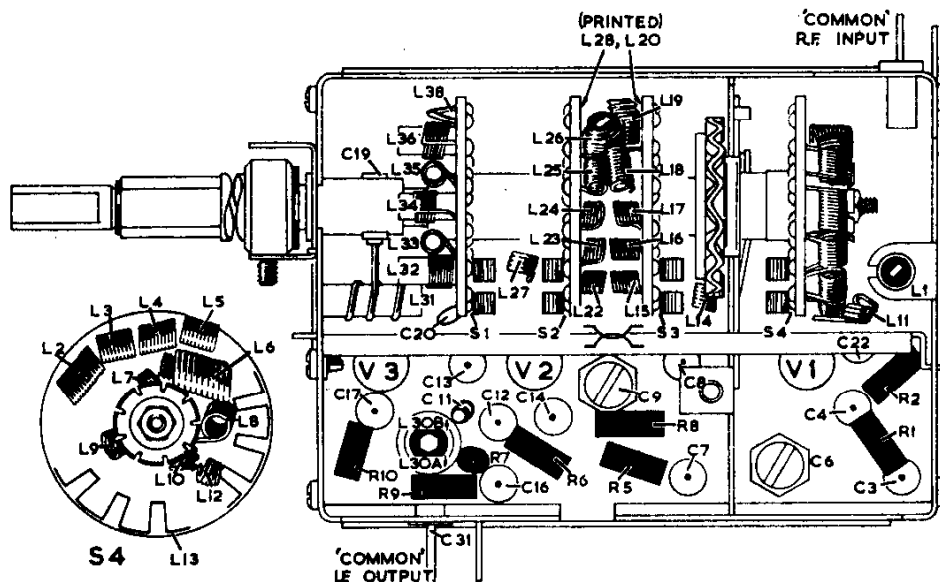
UPPER CHASSIS PLAN VIEW OF TUNER UNIT
